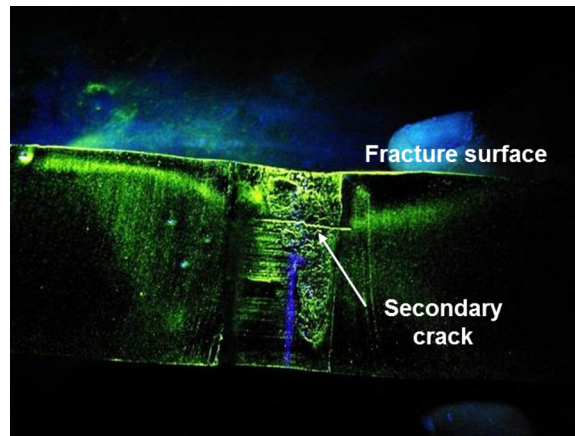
Secondary crack revealed by magnetic particle inspection.
